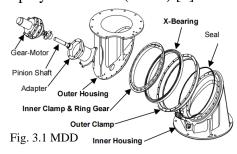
shows the structural composition of the MDD. The outer ring of the X-Bearing is mounted to the outer clamp, which is mounted to the outer housing (the moving part). The bearing's inner ring is mounted to the inner clamp, which is fixed to the support and features a ring gear. The motor, mounted to the moving part, will rotate the pinion shaft against
